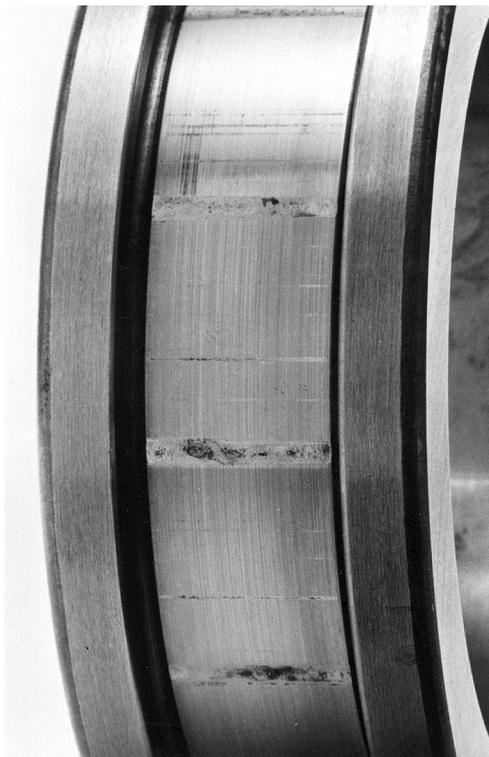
False brinelling on inner ring raceway of cylindrical roller bearing
